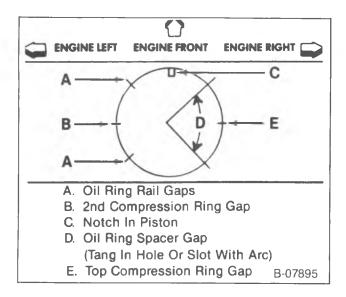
Piston Ring End Gap Location (5.0L and 5.7L Engines)
